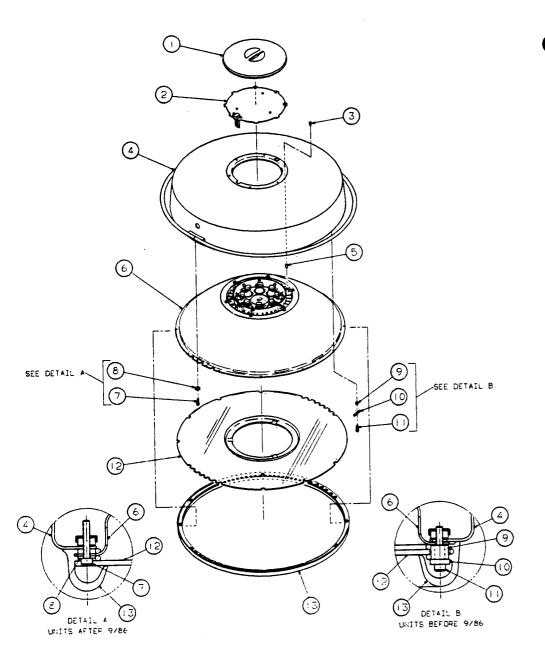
LIGHTHEAD	ASSEMBLY	(Part 1 of 2).
